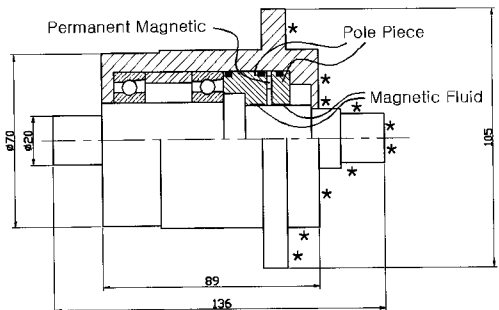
Dimensions of a magnetic fluid seal (mm, ★'s are inside of chamber)
